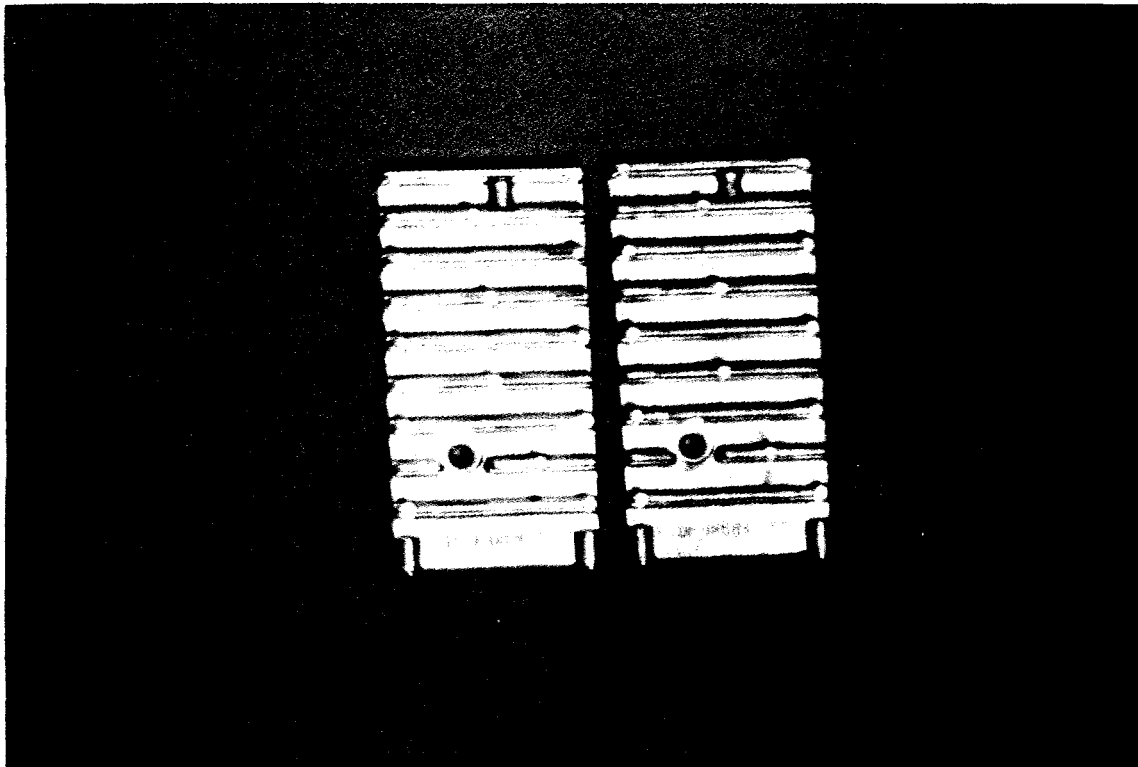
Electronic heat sink castings produced by Company B for die soldering confirmation trials.
